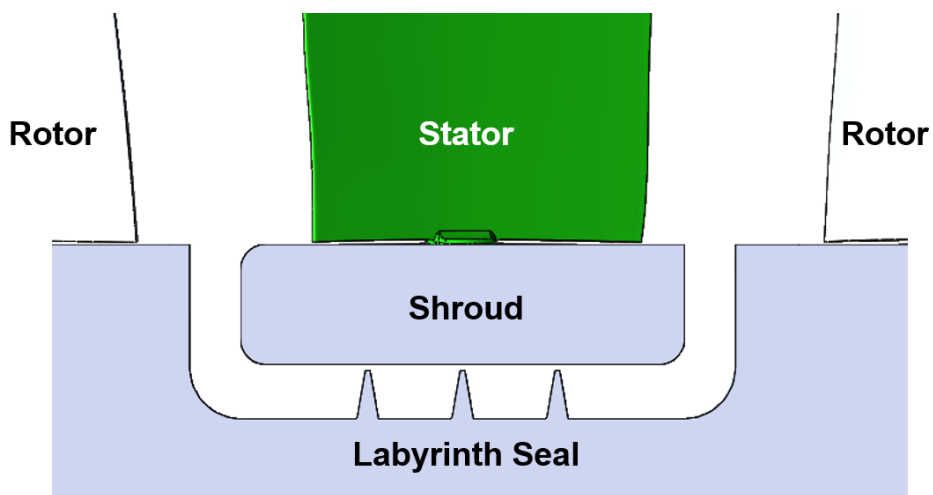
Cross-Sectional View of the Designed Labyrinth Seal Geometry
